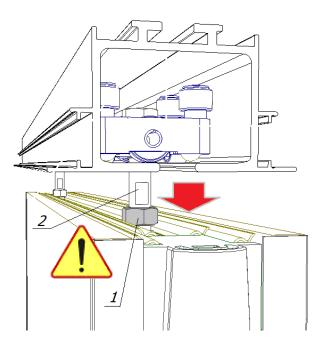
Countering the carriage 1-locknut countering the carriage 2- carriage bolt
